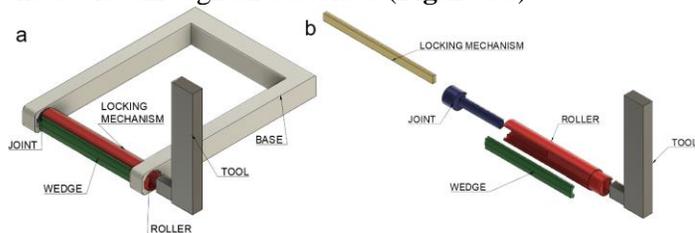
Final Strain Scout Scaffold Design. a) Final labeled drawing of Strain Scout device using Fusion 360 b) Exploded drawing of stretching mechanism using Fusion 360
